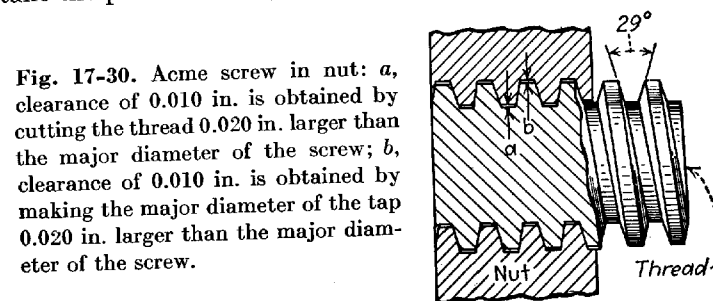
Acme screw in nut: *a*, clearance of 0.010 in. is obtained by cutting the thread 0.020 in. larger than the major diameter of the screw; *b*, clearance of 0.010 in. is obtained by making the major diameter of the tap 0.020 in. larger than the major diameter of the screw.
